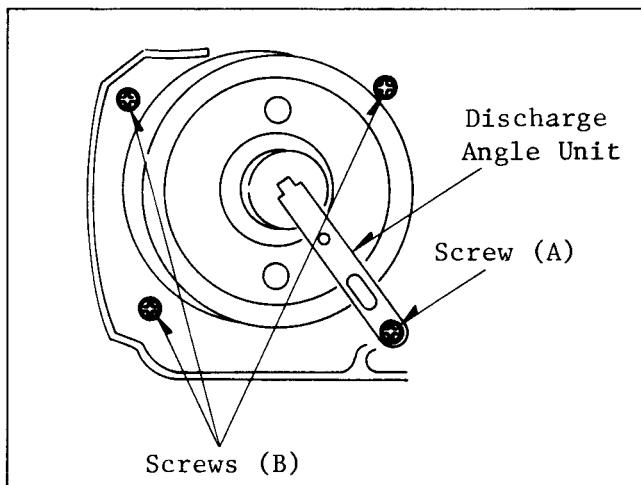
Replacement of D.D. Cylinder Unit - (1)
